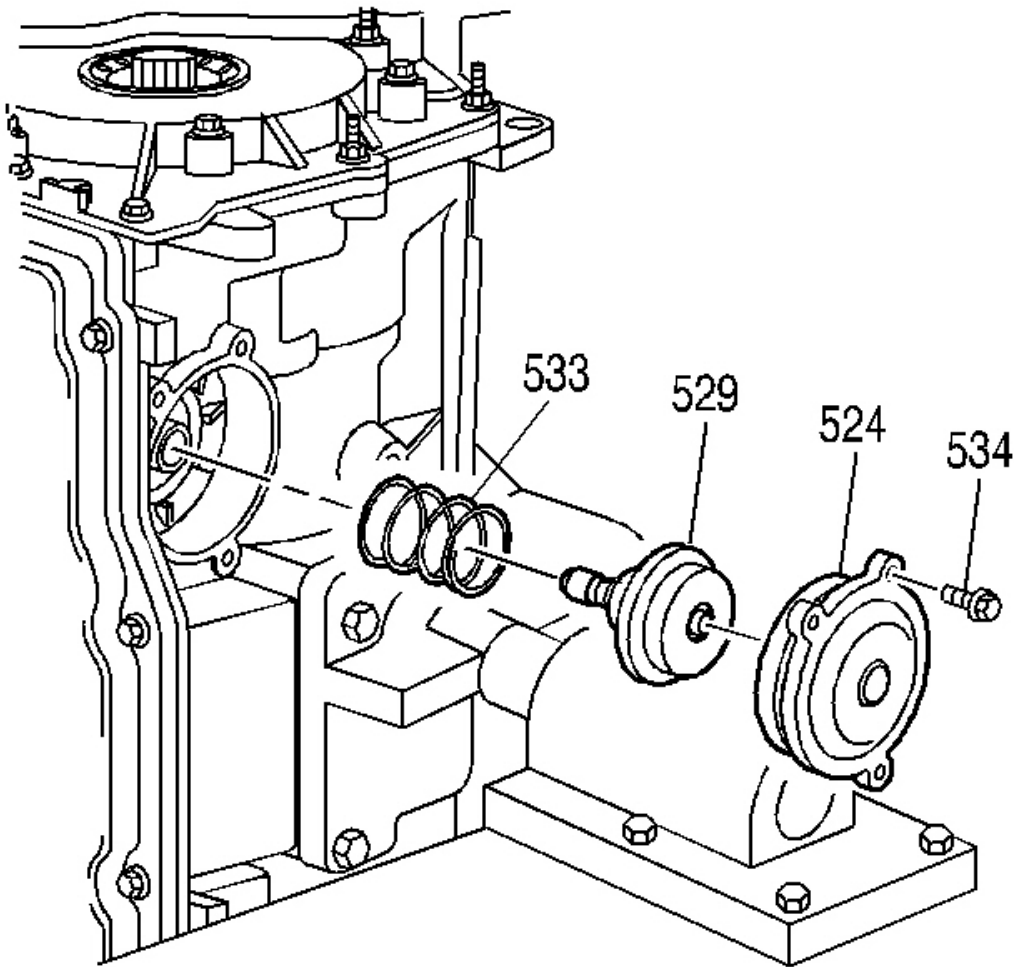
Identifying 4th Servo Piston Assembly And Cover
